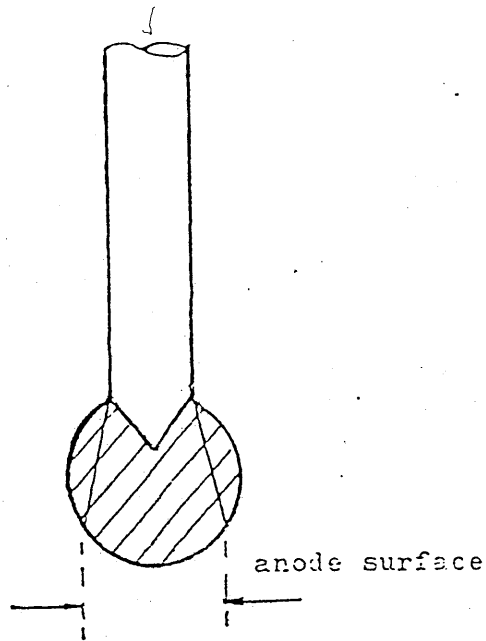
Model of globular transfer mechanism (Ref. 44)
